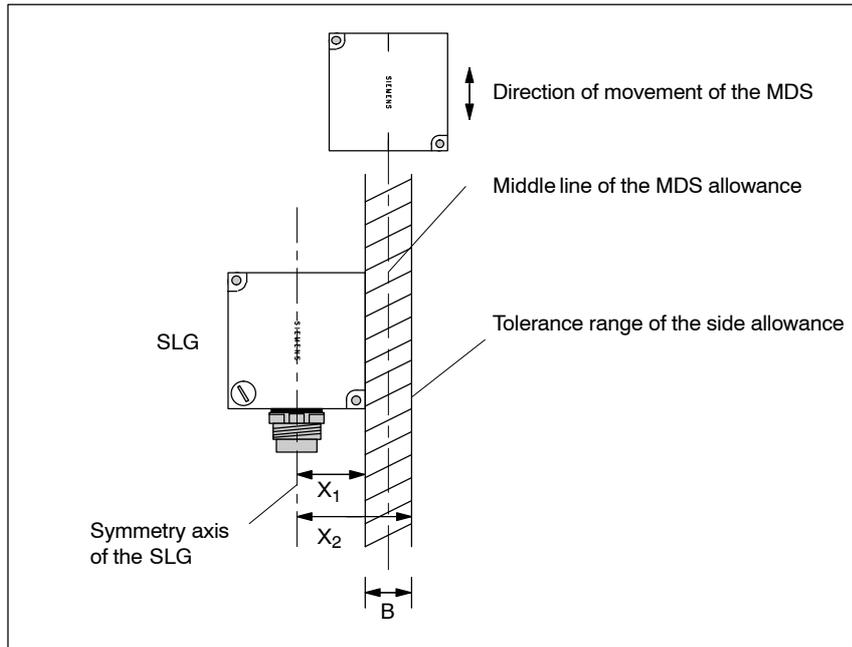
Tolerance of the side allowance of the pallet
